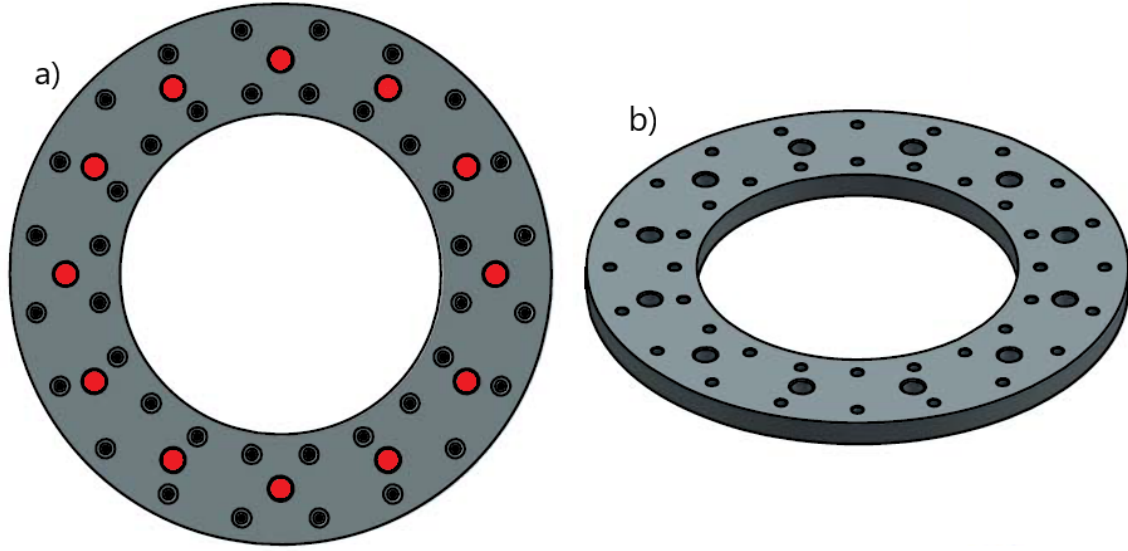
Radial RDE Fuel Line Mounting Ring. (a) Top View and (b) Bottom View.
